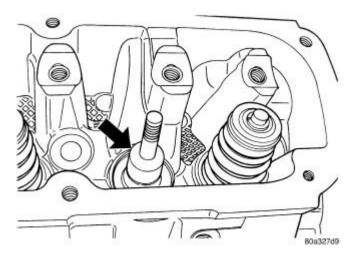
Valve Stem Seal Courtesy of CHRYSLER LLC
